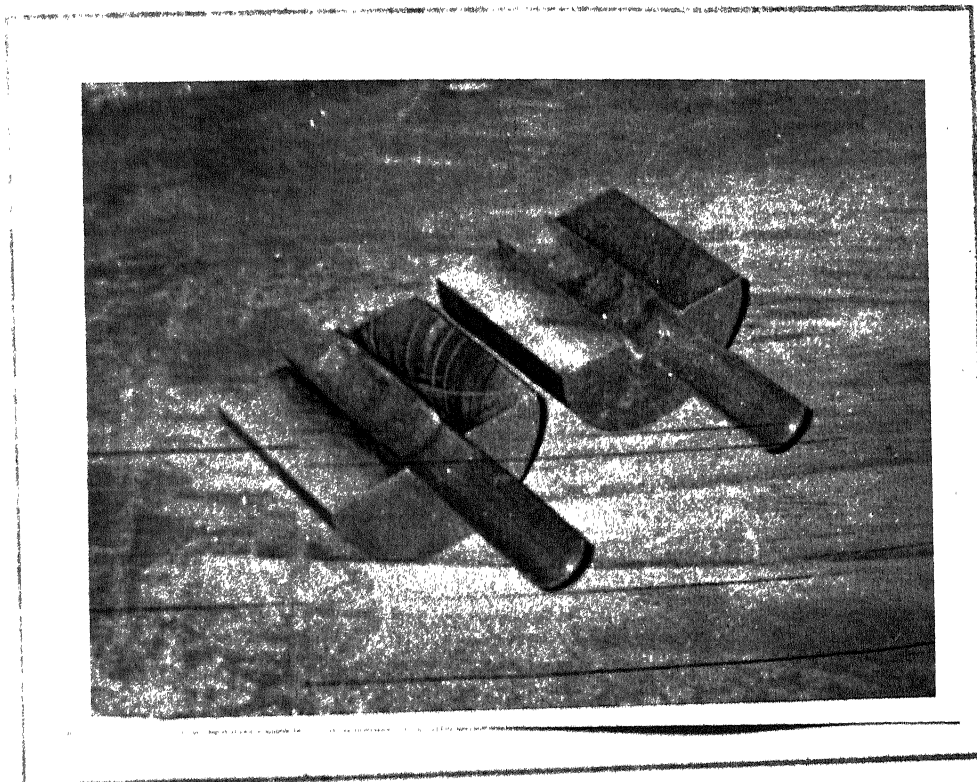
A WELDED PIECE (Expt. no. 3) SHOWN IN TWO HALVES
